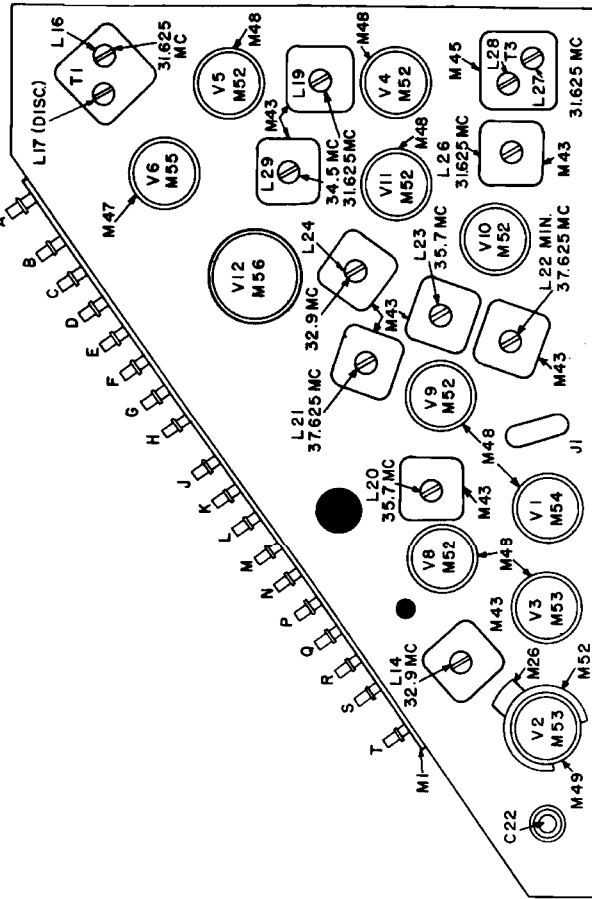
COMPONENT DIAGRAM - TOP VIEW OF RF CHASSIS
